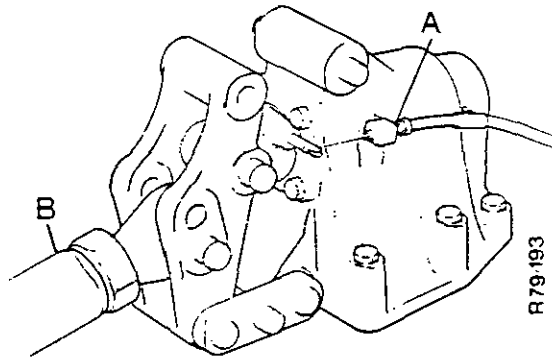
REMOVAL OF THE ADJUSTABLE SENSING UNIT
